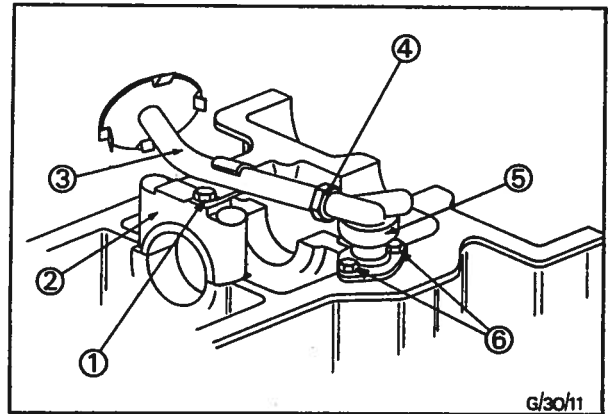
Oil Pump Removal/Replacement - 2722, 2723, 2725 and 2726T Engines not fitted with High Inclination Oil Pans
